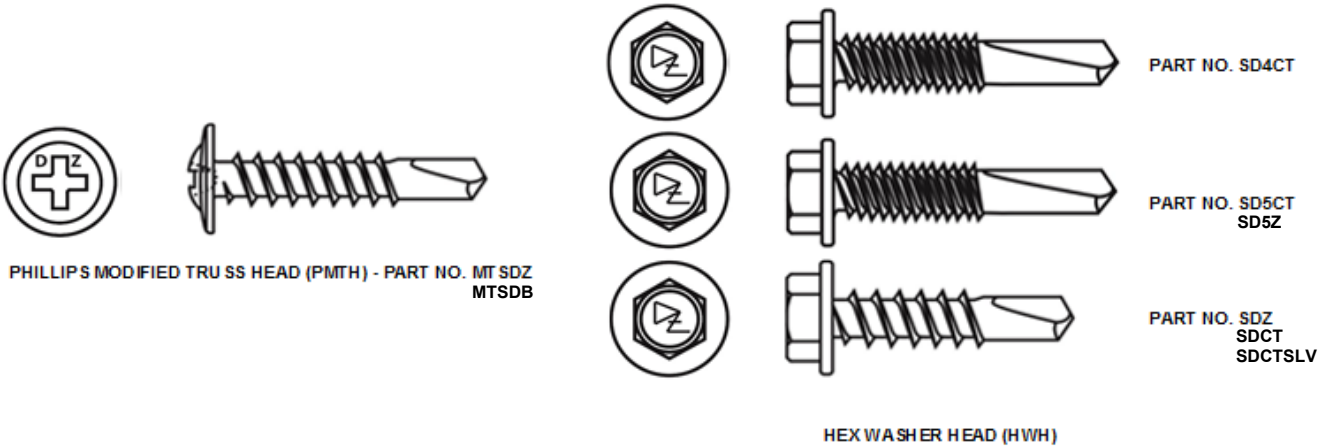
DAGGERZ™ SELF DRILLING FASTENERS
